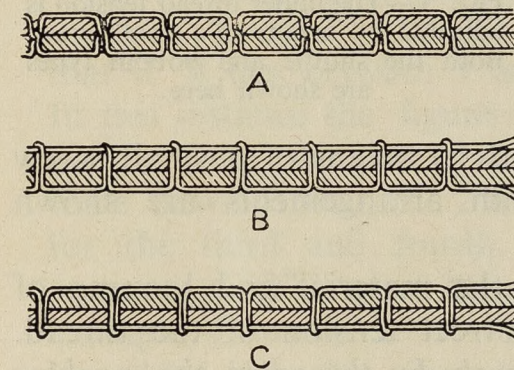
The correct form of machine stitch is shown at "A." "B" shows how the looping of the stitches occurs if the upper thread be too tight. "C" shows effect of the upper thread having too little tension.
